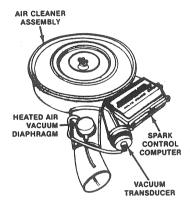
Vacuum transducer. (Courtesy of Chrysler Motors Corp.)
